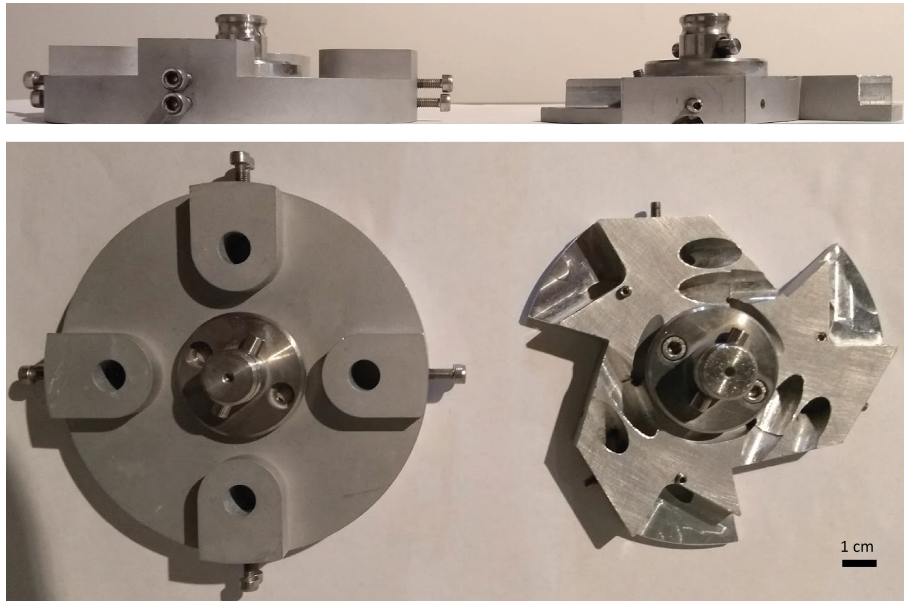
Custom polishing holders. Side and top views of flat and angle polishing holders fabricated from aluminum.
